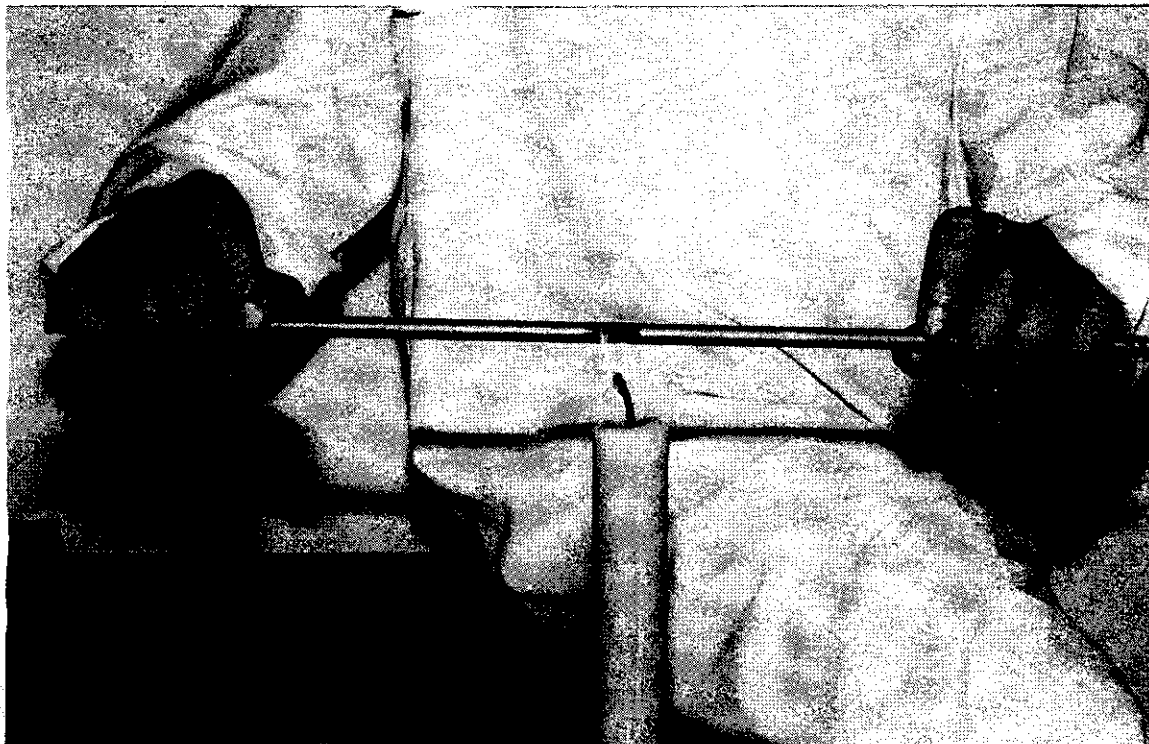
Heating the sand-filled metal tube with a candle in order to make a 90° bend.
